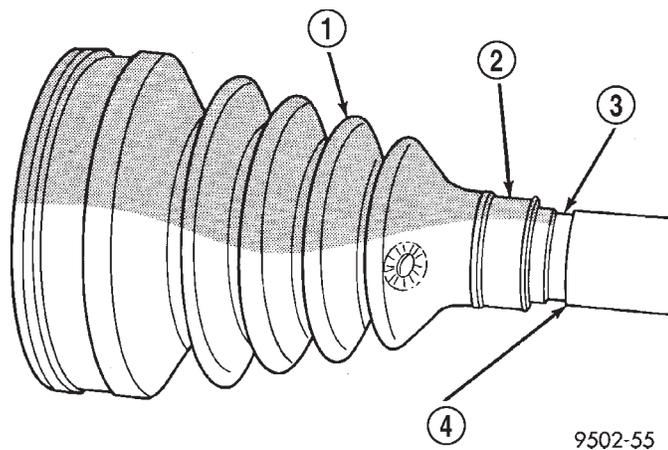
Sealing Boot Installation on Interconnecting Shaft
